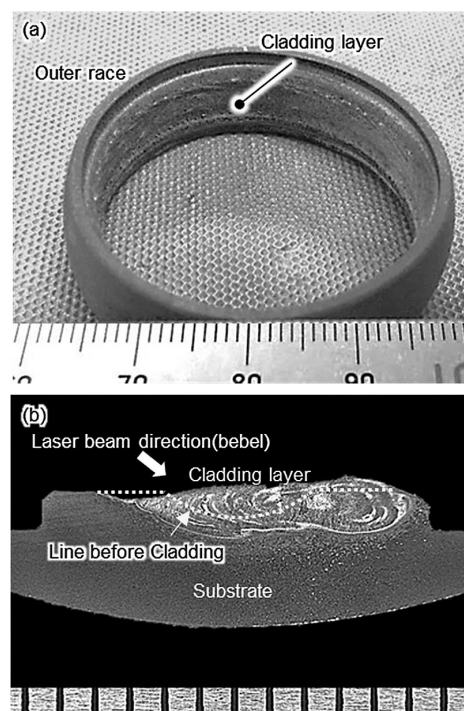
(a) Appearance and (b) cross section of outer race after LMD test.
